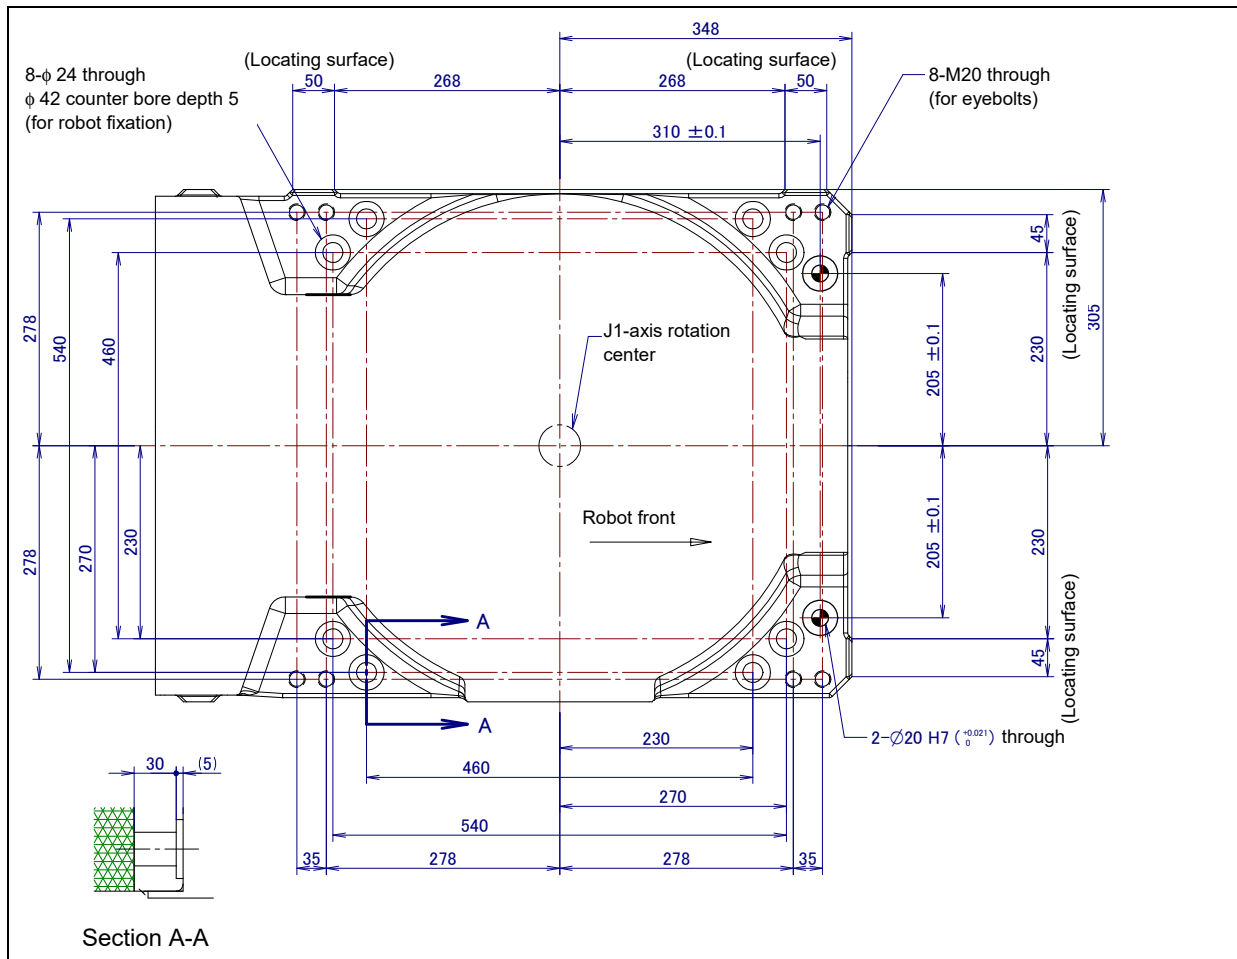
(b) Installation hole dimensions of the robot base (pedestal type) (M-410iC/185/315/500)
